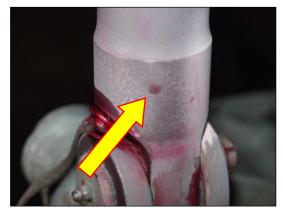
An example of a defect in the welded joint area [3]
